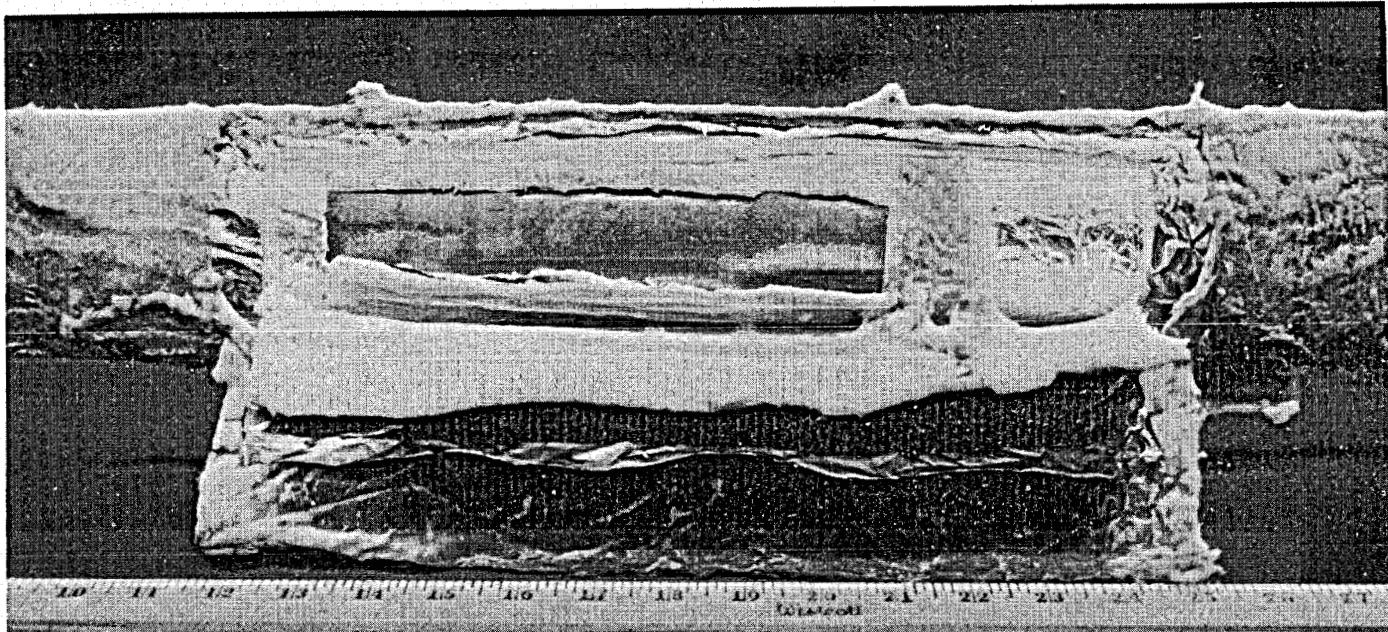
DRILL STRING INSULATION ASSEMBLY FOLLOWING 1100°C RADIANT HEAT TEST.
